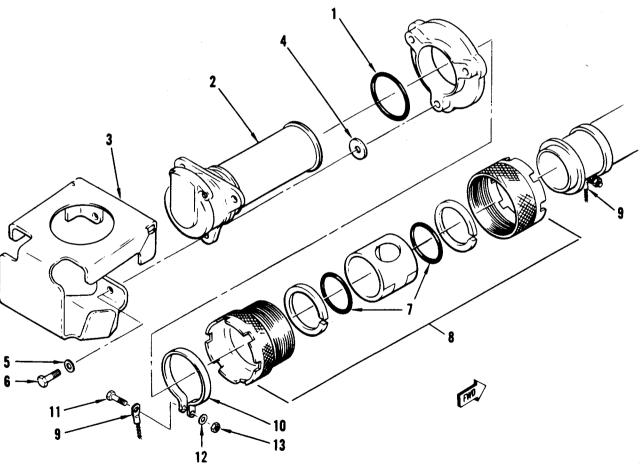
Installation; Aft Fuselage Tank (Sheet 12)
